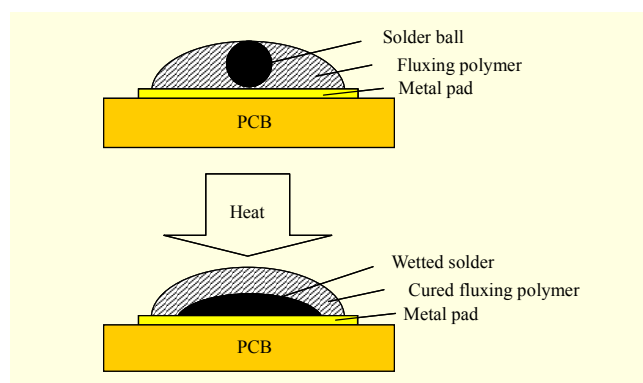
Measurement method for the solder wetting angle with a diameter of 0.76 mm on Au and Cu pads.
